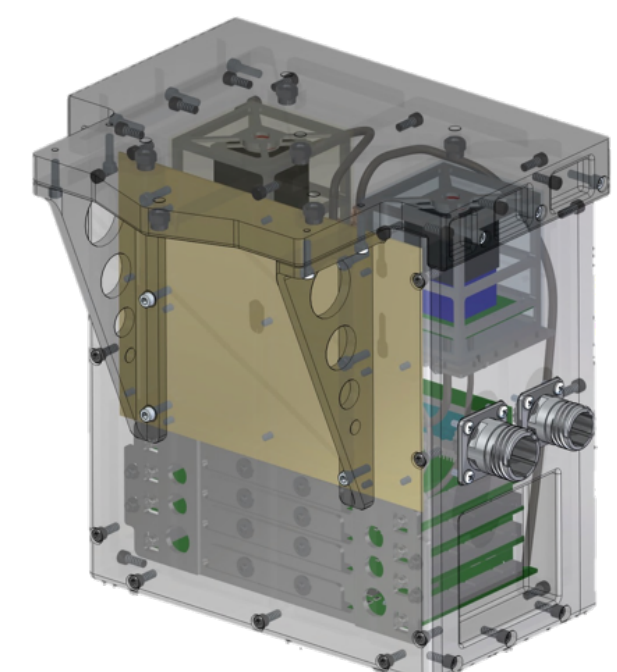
Backside of NMS CAD model showing additional supports and cadmium shielding minimizing the sensors view of the fuel tanks. [2]
